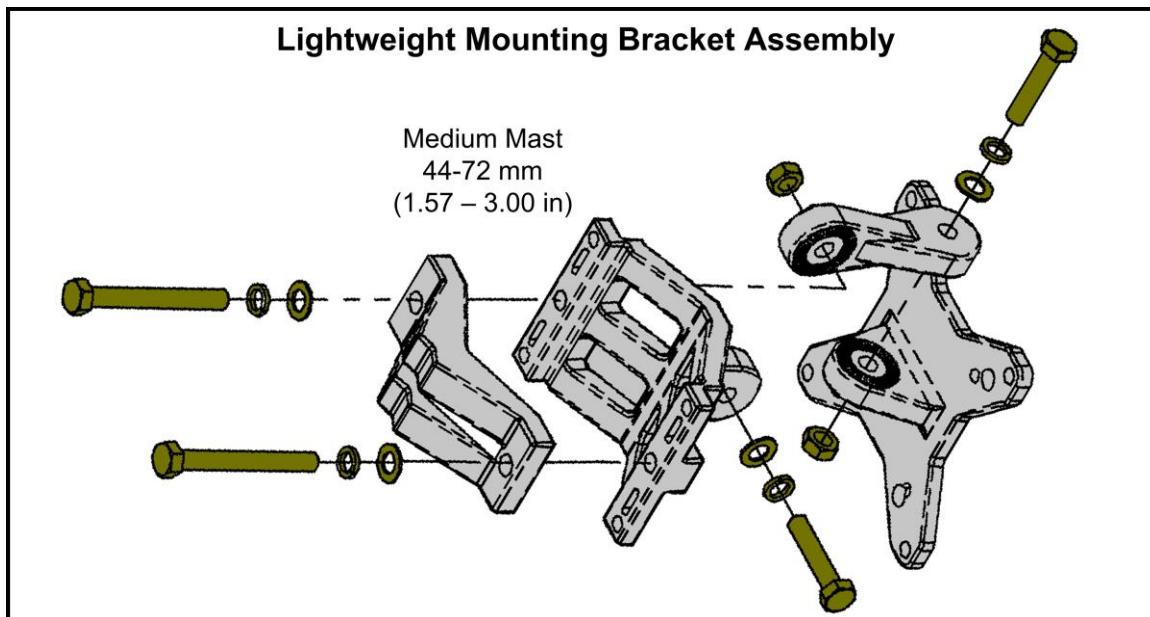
Installation: Mounting Kit - Assemble Bracket Arm
